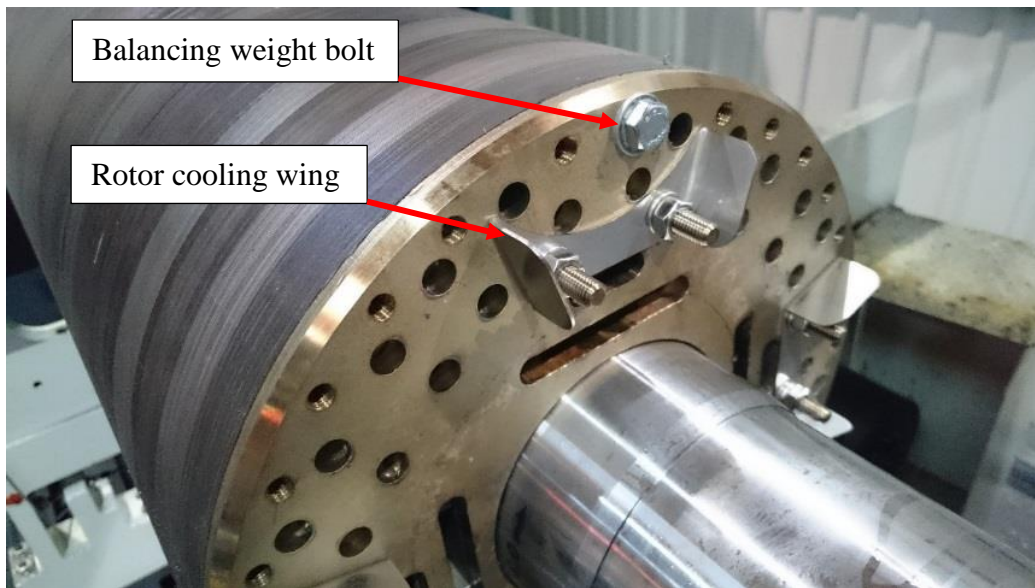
Rotor in a balancing bench where can be seen the rotor cooling wings and the one balancing weight.
